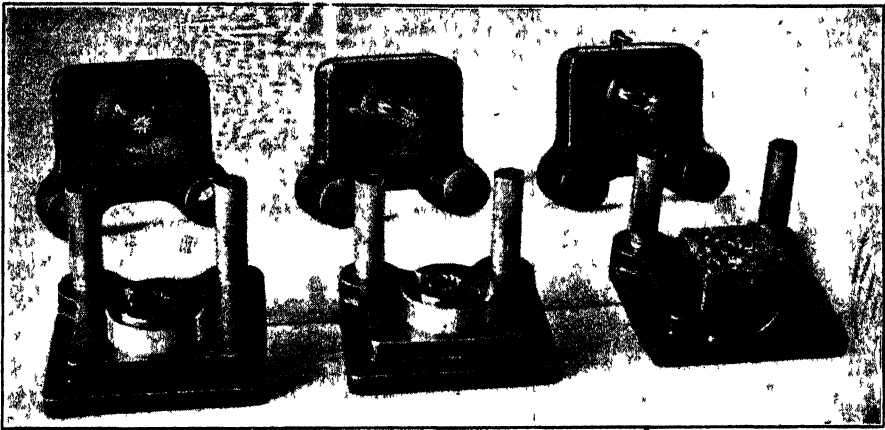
A set of dies for blanking and shaving a small-toothed wheel
